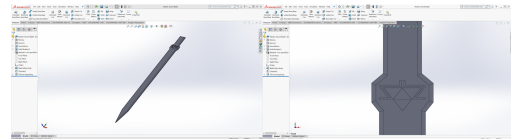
Master Sword blade Solidworks CAD model in isometric view and close up on "Tri-Force" symbol detail
